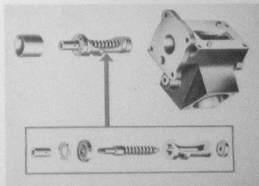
Assembling Wiring Harness Worm Gear Assembly—Composite View
